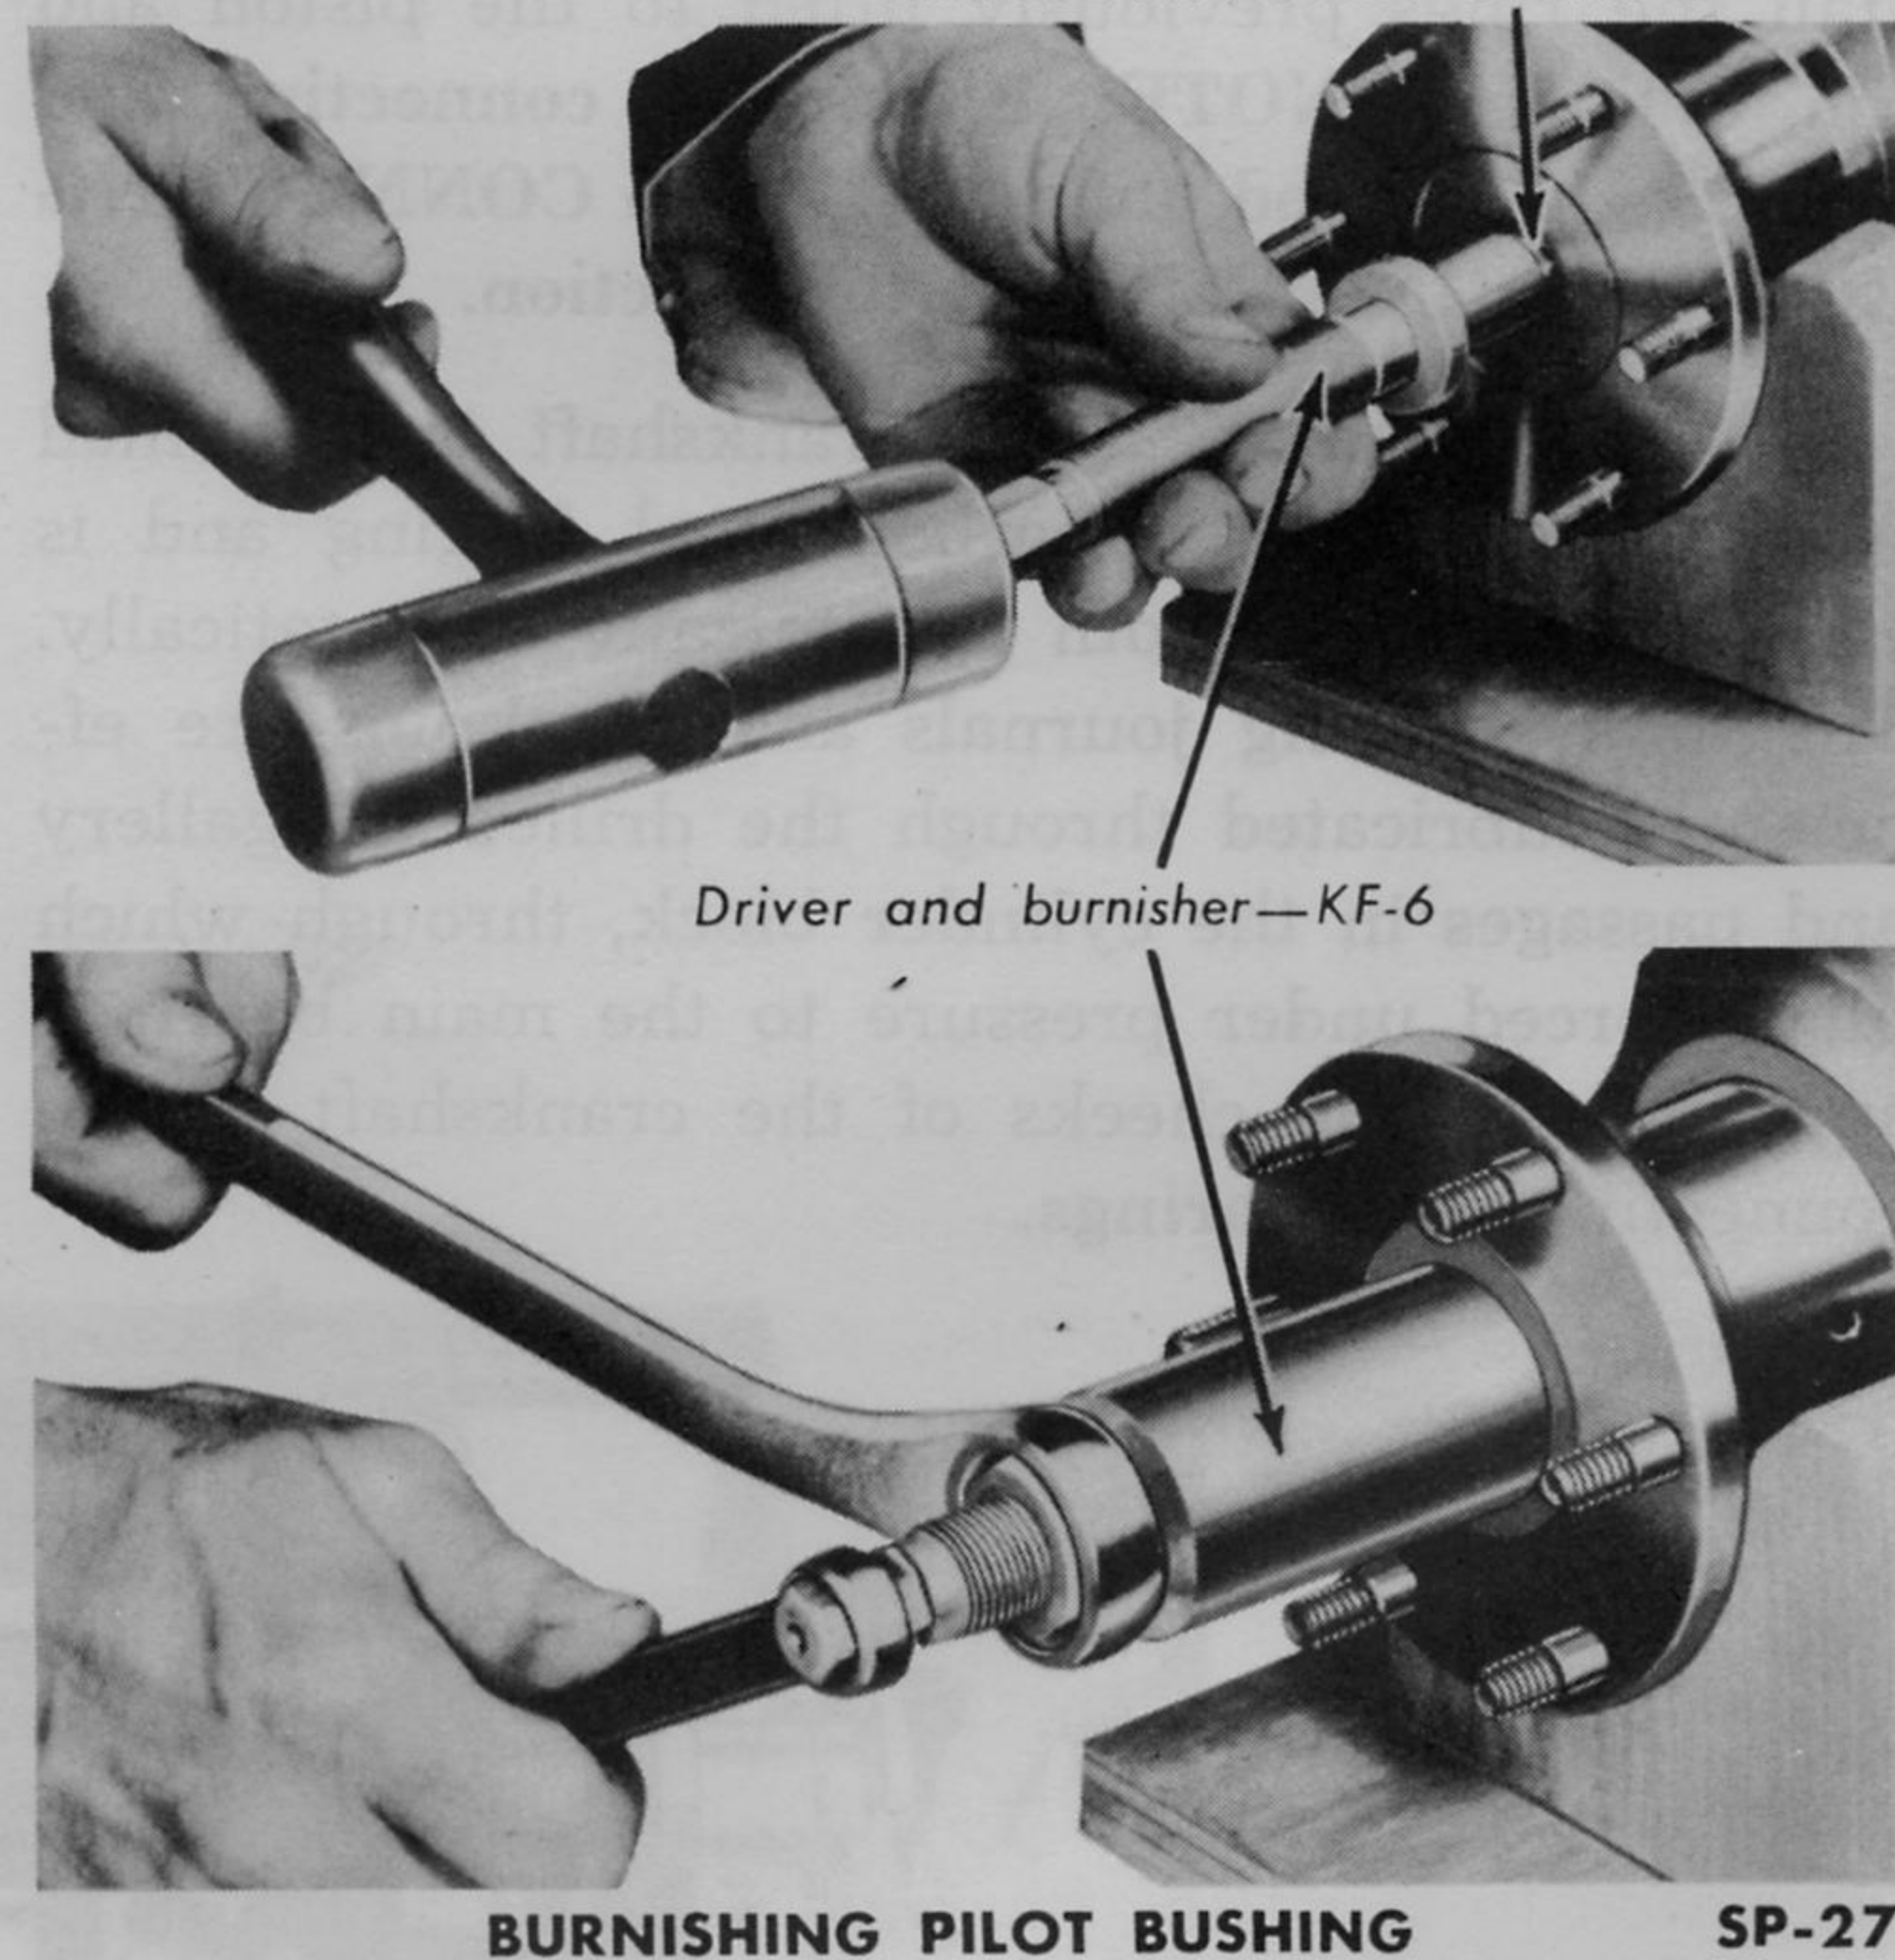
Installing and Burnishing Crankshaft Pilot Bushing
